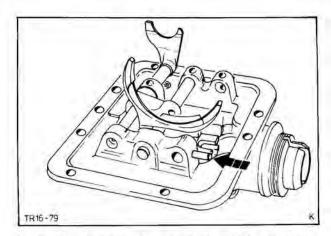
Insert interlock plunger between 3rd/4th gear and 1st/2nd gear selector rails
